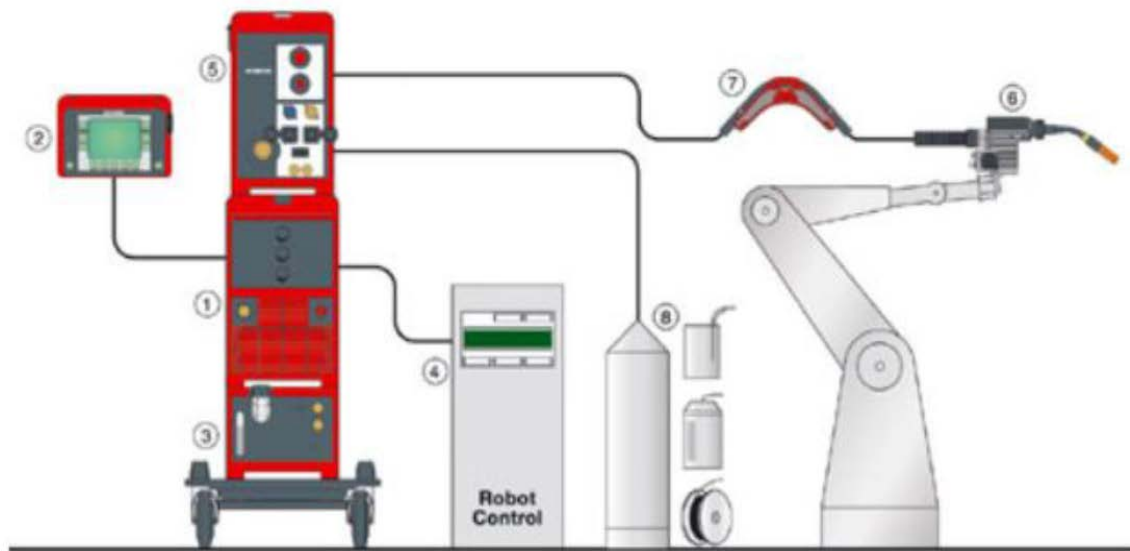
CMT – Welding Equipment, adapted from (Fronius).
